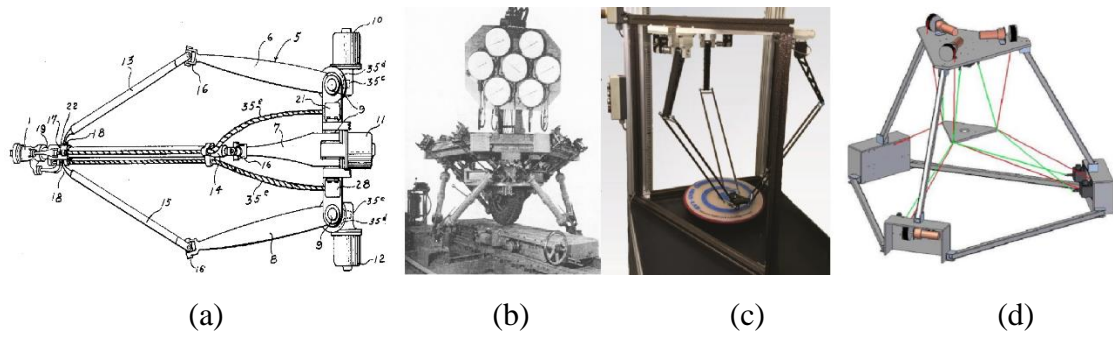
Industrial applications of parallel manipulator, (a) automatic spray painting manipulator [7], (b) universal tyre testing machine [8], (c) delta robot [5], (d) a cable-driven parallel manipulator [9]
